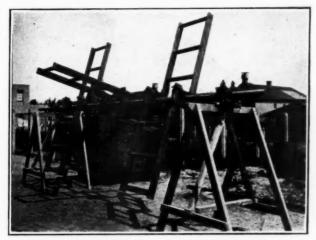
CONSTRUCTION OF STIRRING PADDLES
